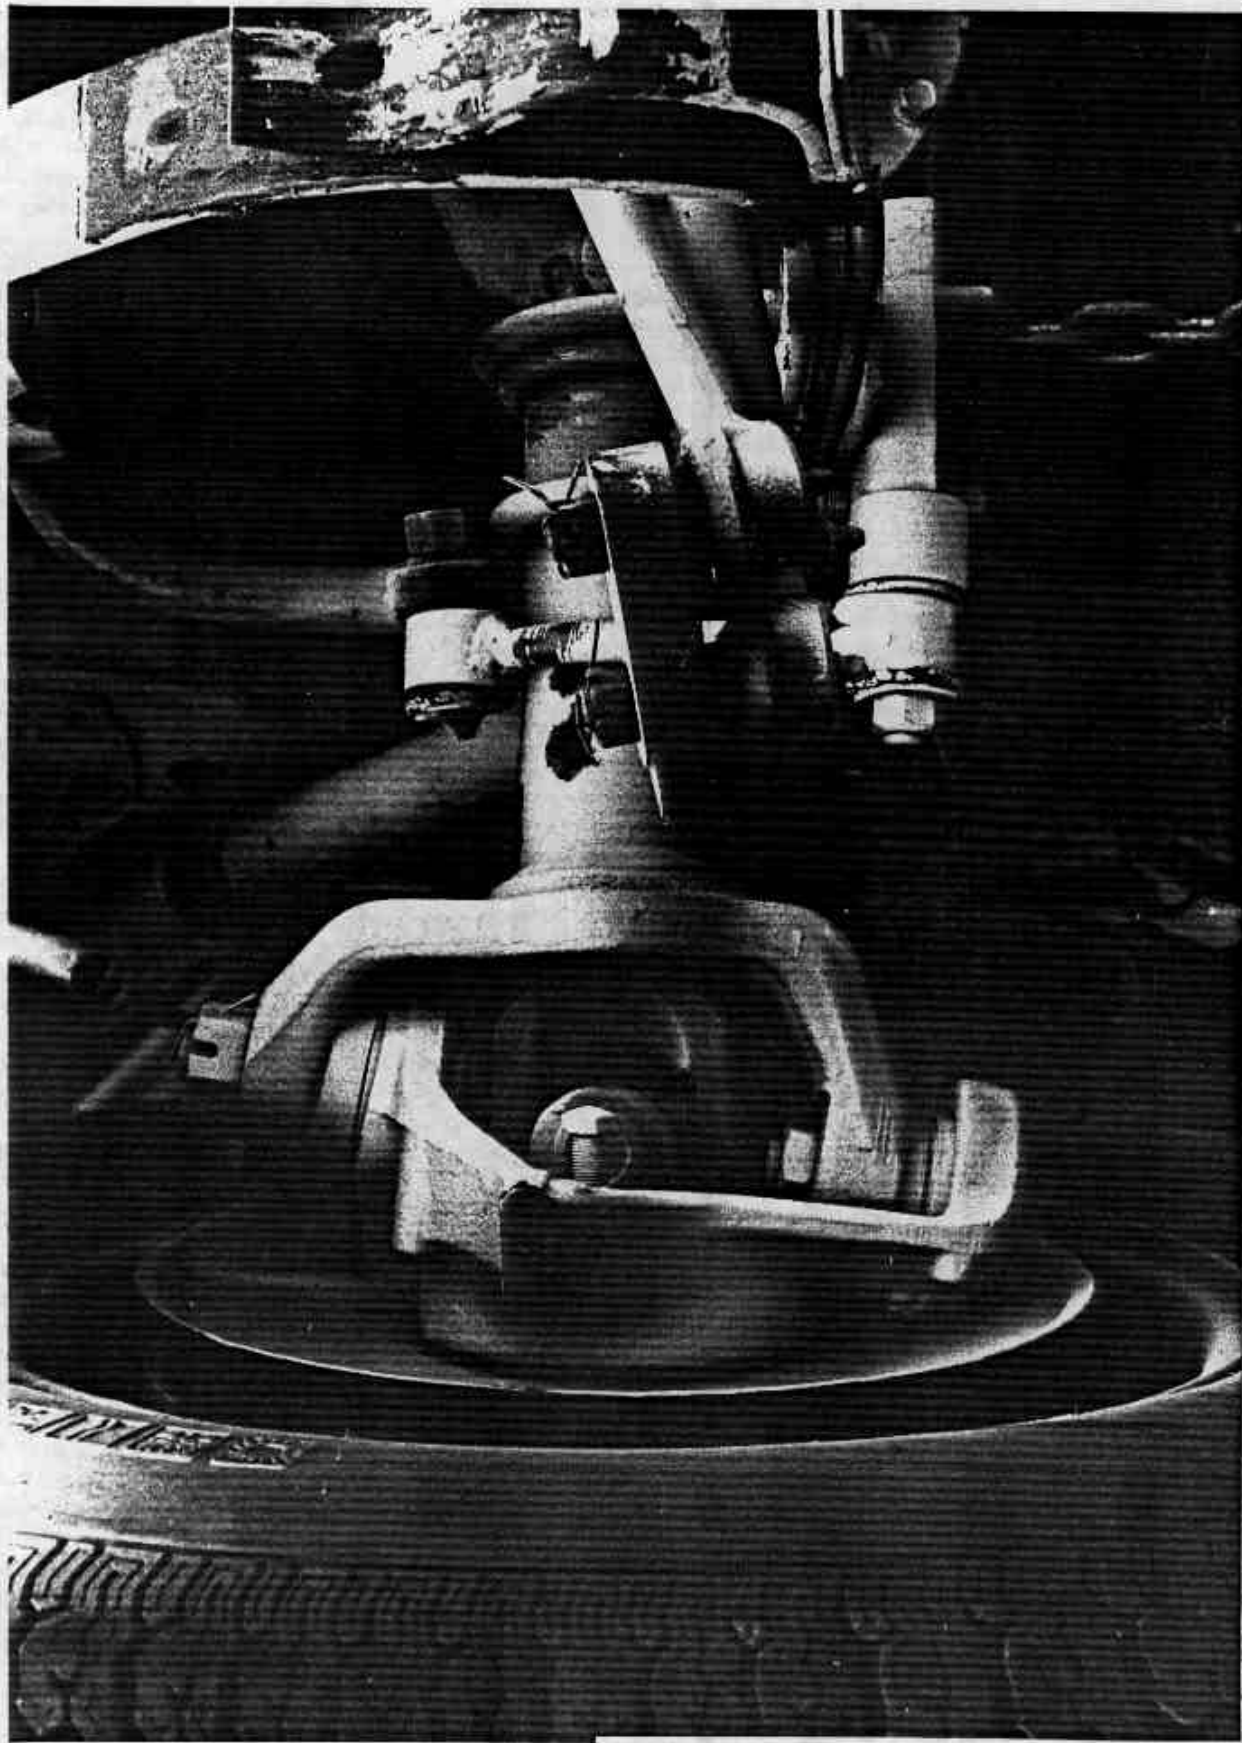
POST-TEST BROKEN WHEEL CARRIER STEERING WHEEL LEAKAGE VIEW
